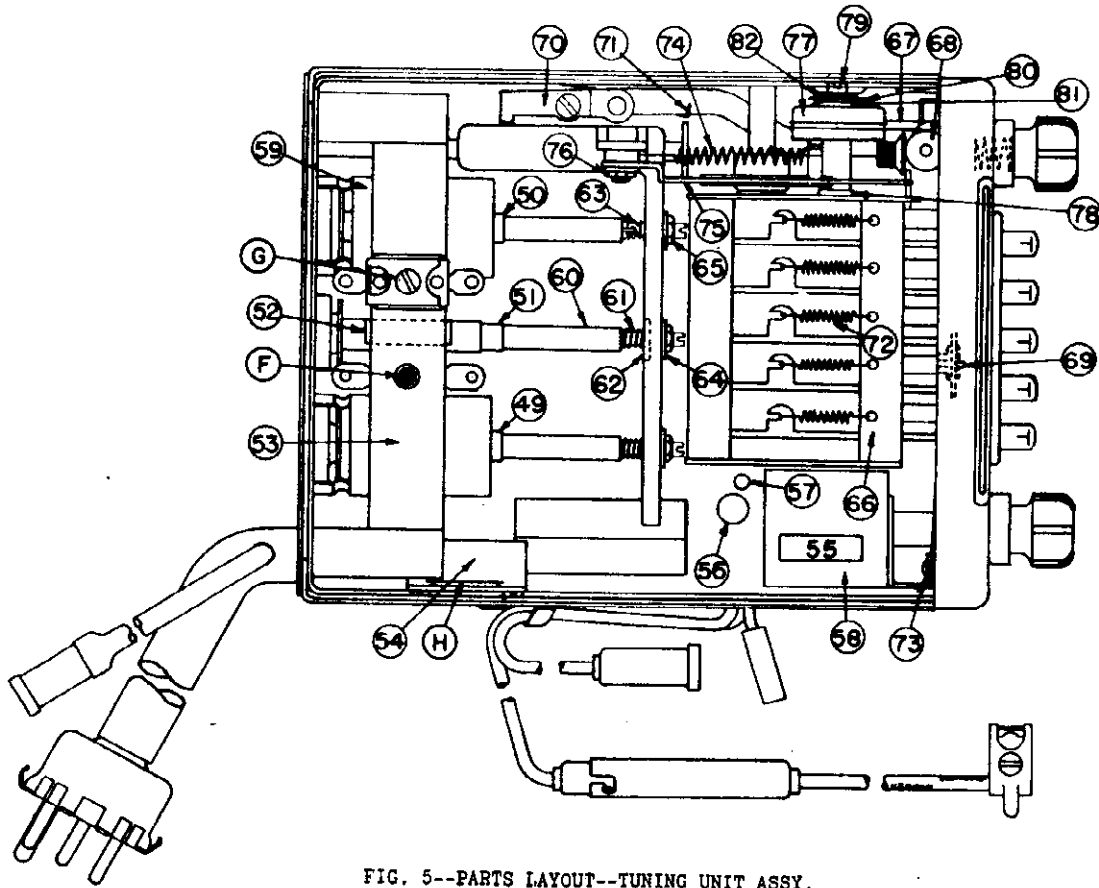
PARTS LAYOUT--TUNING UNIT ASSY.
